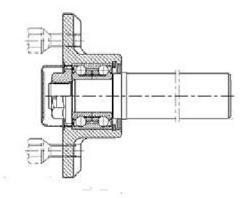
Cross-section of the AL-KO wheel hub with bearing
